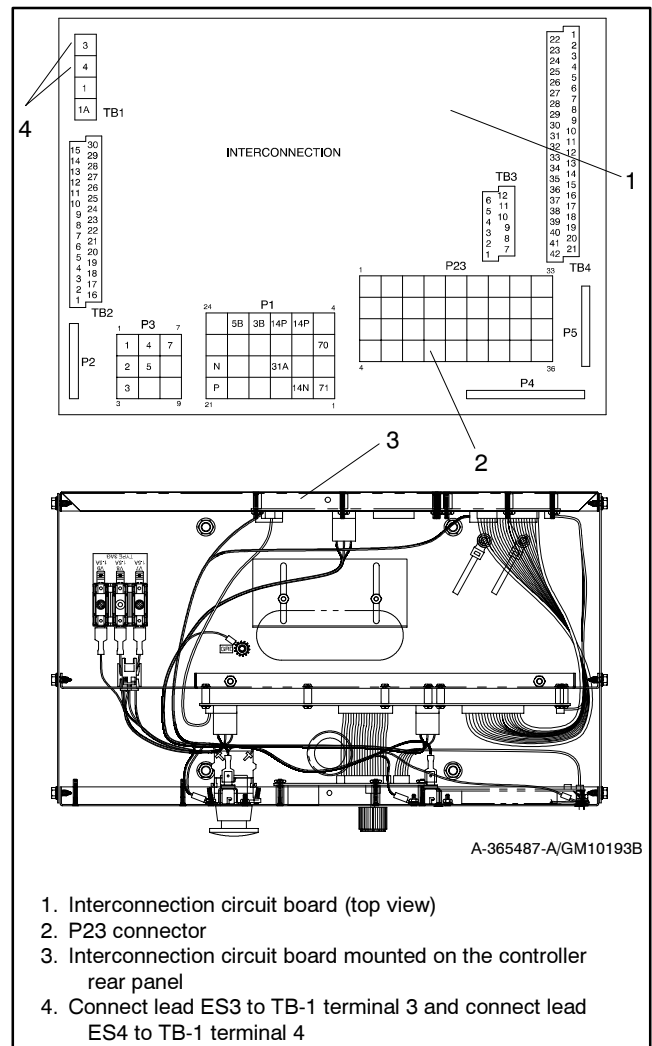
Attaching Wiring Connection Harness to Controller Circuit Board
